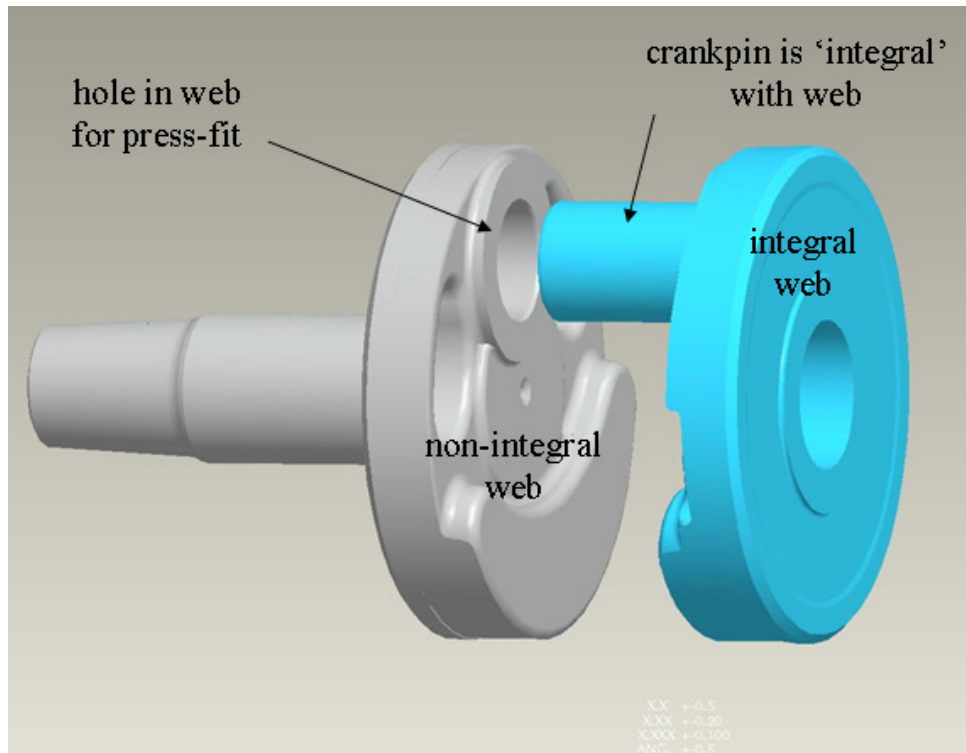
Components of a multi-piece crankshaft in an exploded view.
